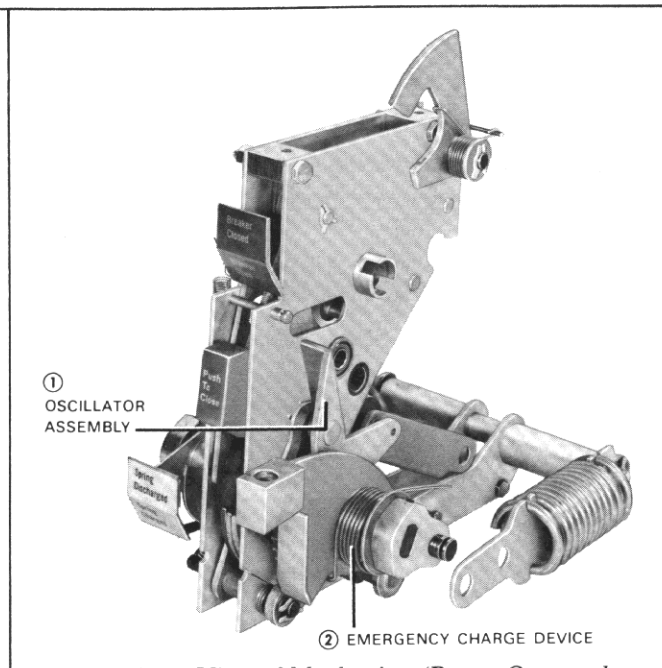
Front View of Mechanism (Power-Operated Spring Charge)
